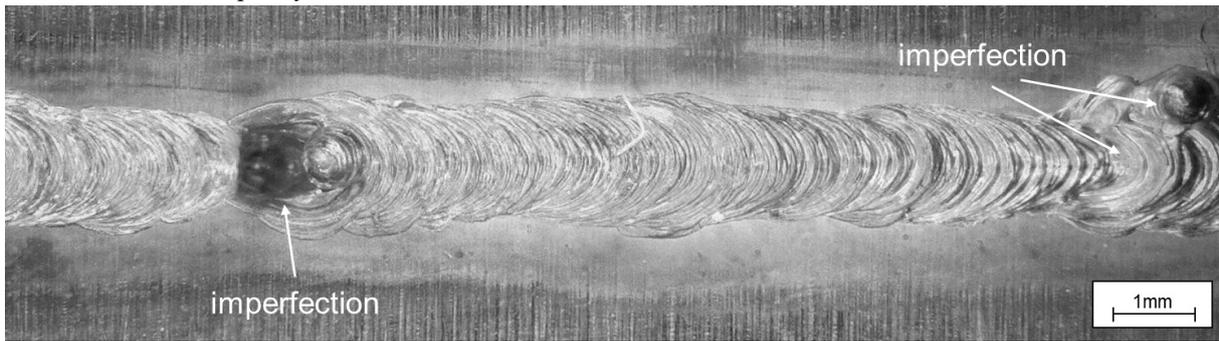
Reference process, $v = 6$ m/min, weld surface.
